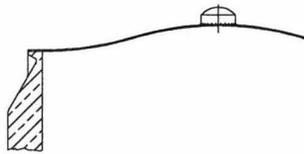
Contact finger of figure 2, showing the profile for welding.
